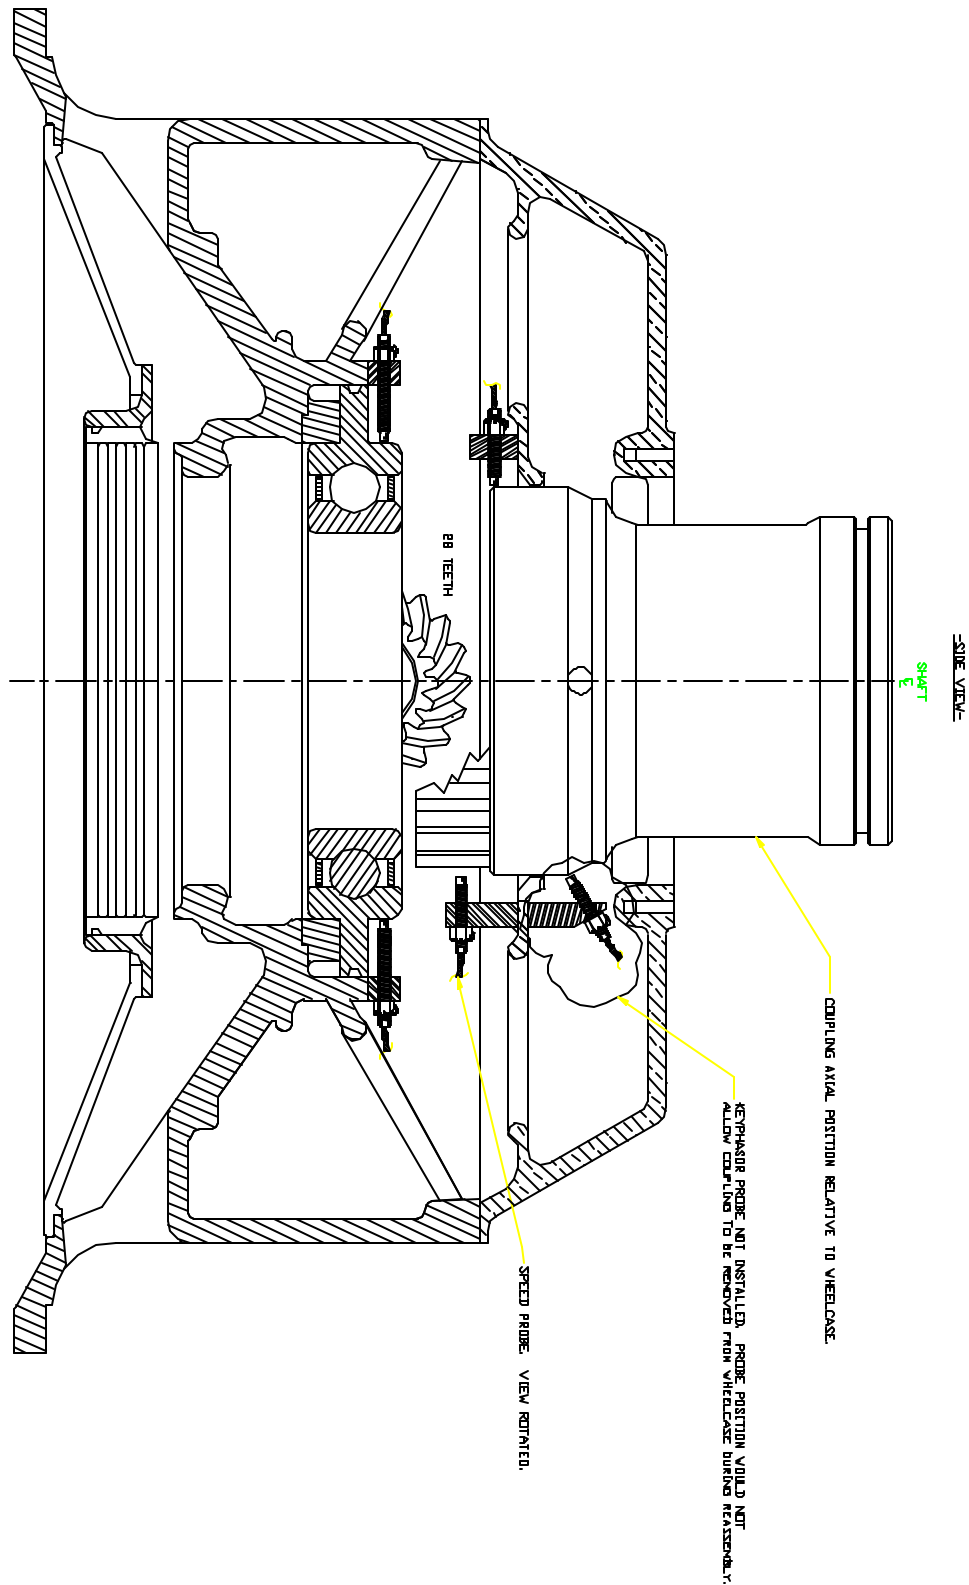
Cross section of internal wheel case with transducers. Two of the three installed REBAM probes are visible, one of the two shaft probes is visible, and the speed probe is visible in this view. The initially proposed Keyphasor® transducer is also shown, but an alternate location has subsequently been chosen.
